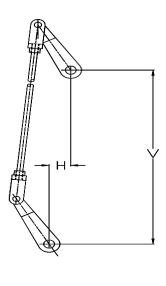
Drive Arm Assembly Reference Drawing
